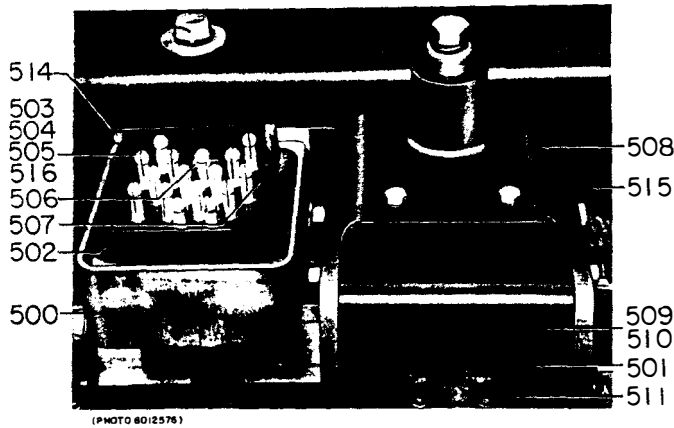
A. Front view of type MS-13 mechanism for the type AM-4.16-2 breaker
